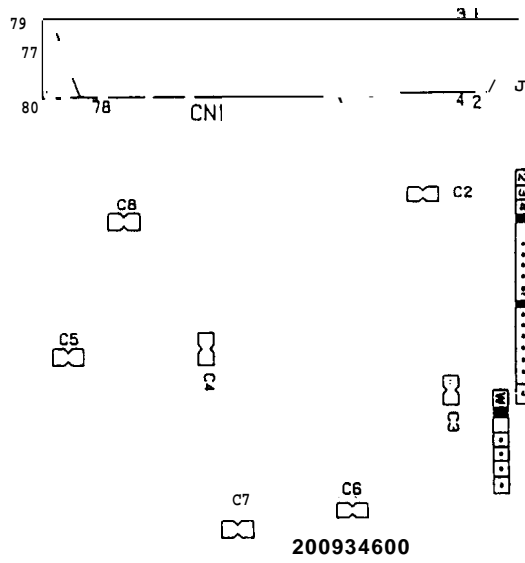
C82907* ROM-B Board Component Layout (Back Side)
